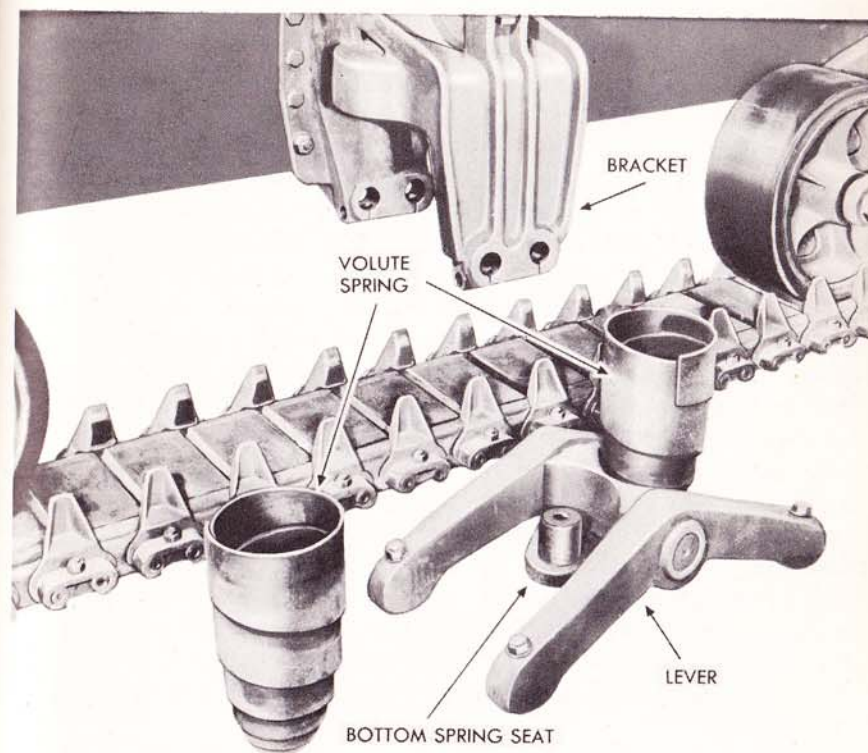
Volute Springs, Levers, and Bottom Seat, Removed
